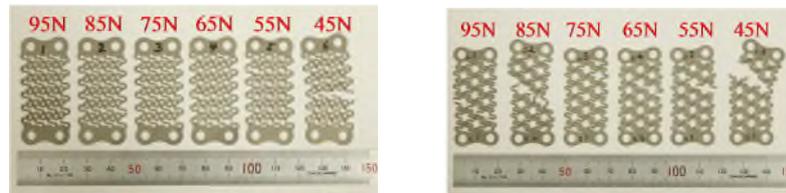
Typical meshed plate specimens after tensile fatigue tests (left: 90° specimen, right: 60° specimen).
